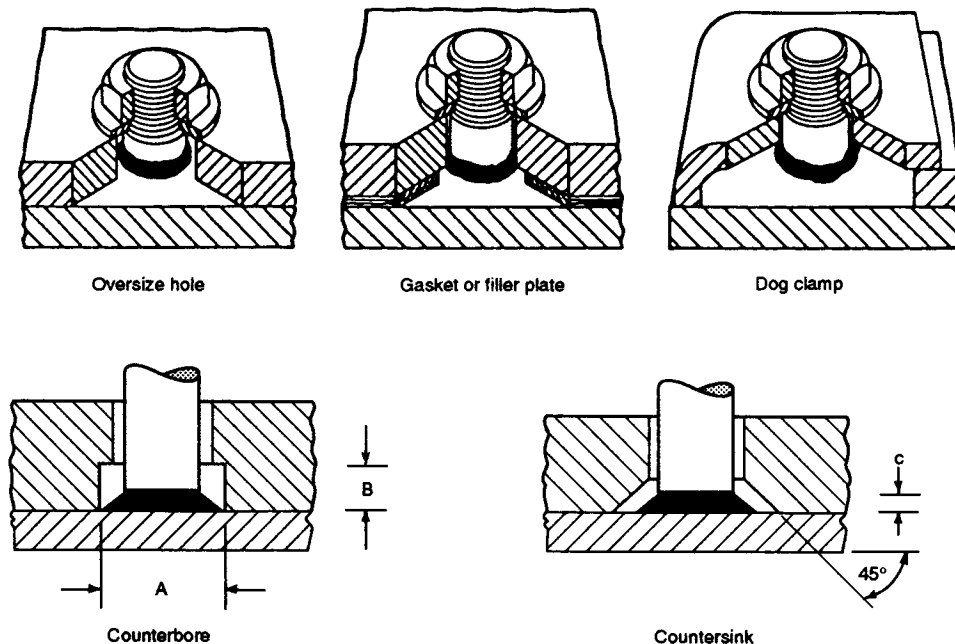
Common methods for accommodating weld flash (fillet) with stud arc welds. Typical dimensions for A, B, and C are given in Table 4.
